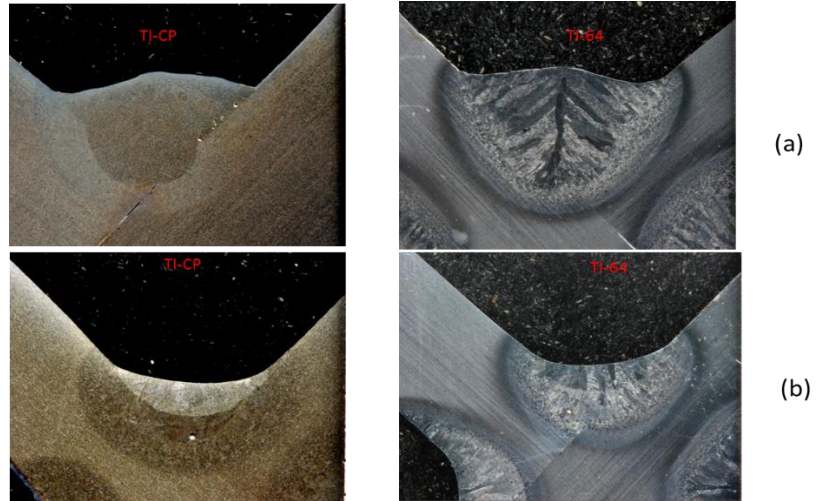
Representative weld macros for Ti-CP and Ti-6-4 weldments: (a) MIG welded specimens; (b) TIG welded Specimens
